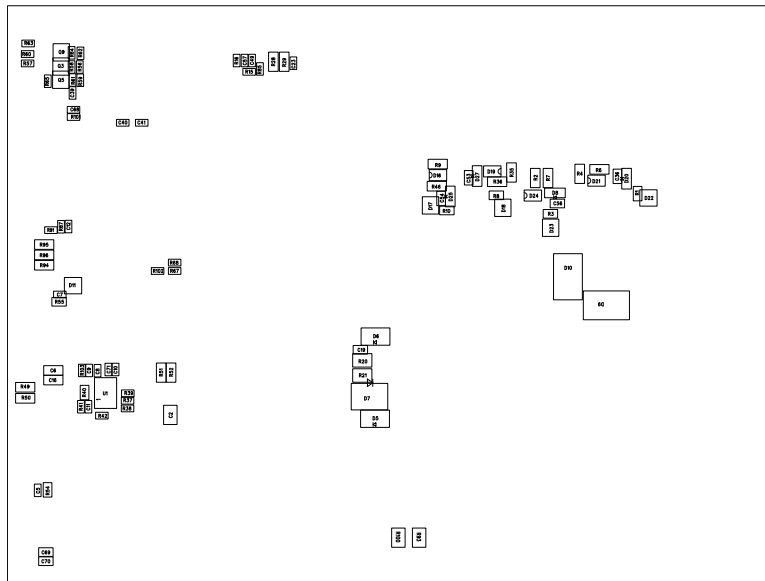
UCD3138PSFBEM-027 Bottom-Layer Assembly Drawing (Bottom view)
